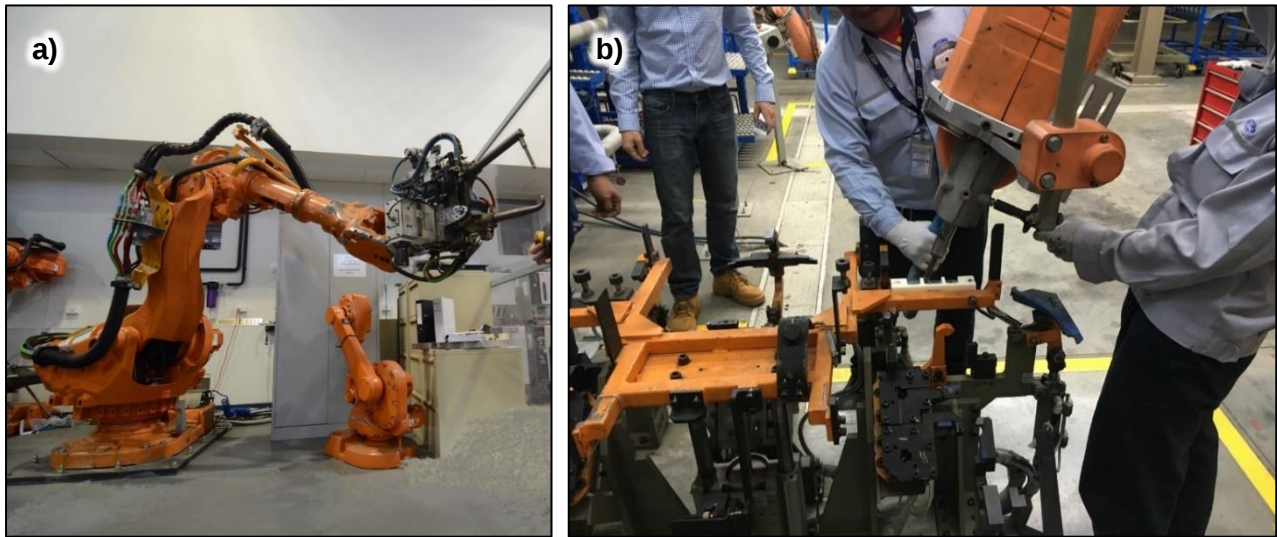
a) MFDC robot spot welder at the ANU, b) Thailand automotive manufacturing plant spot welder
